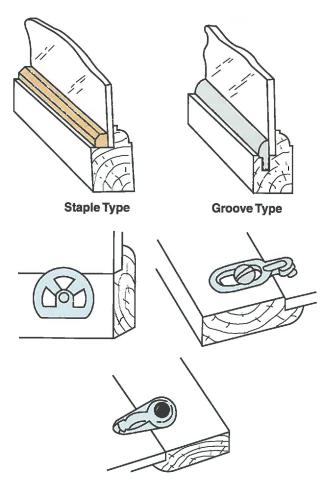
Wood or vinyl stops and plastic retainers hold panels in rabbeted frames. (The Woodworker's Store)
